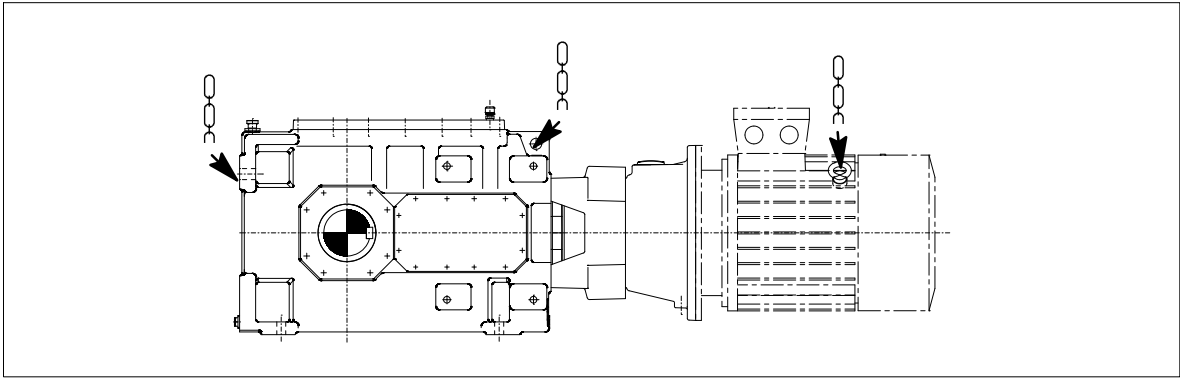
Attachment points on gear units of type B3.. up to size 512 with motor and bell housing
